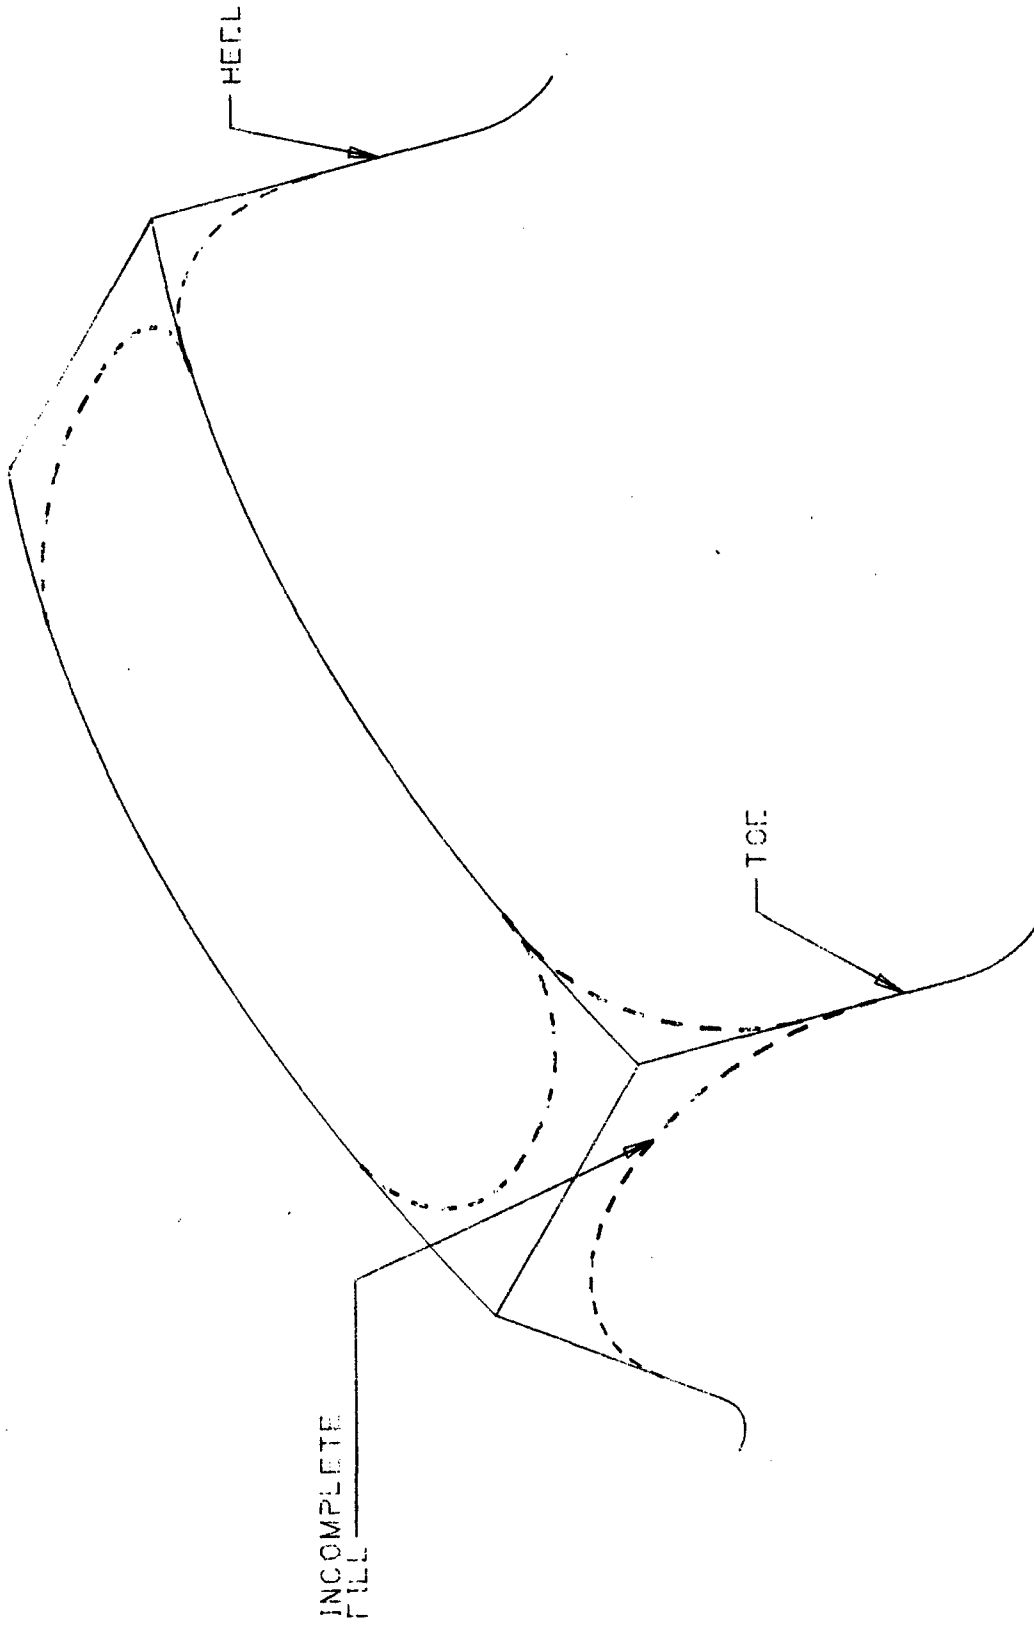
Schematic Representation of the Incomplete Filling of the Toe and Heel of the Forged Gear From the Second Forging Trials
